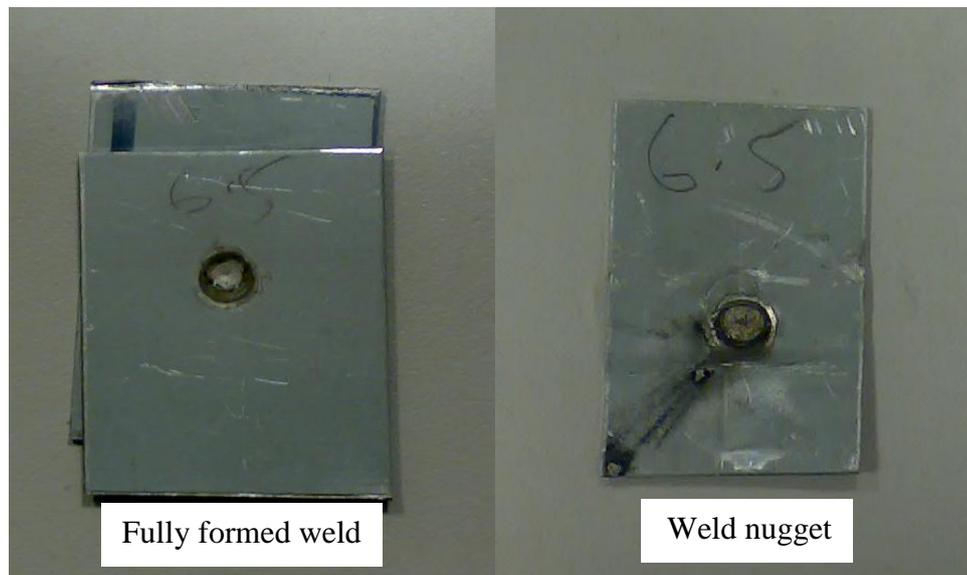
Good quality spot weld nugget at 6.5kA before and after the peel test
